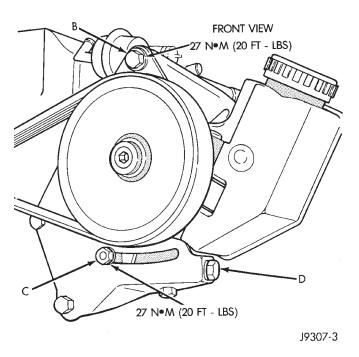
P.S. Pump Front Mounting Bolt/Locknut— Typical
